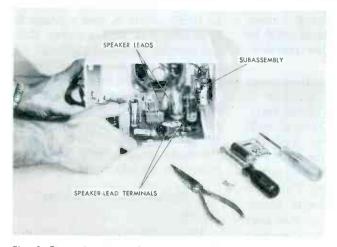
Removing Printed Board After Disconnecting Speaker.
